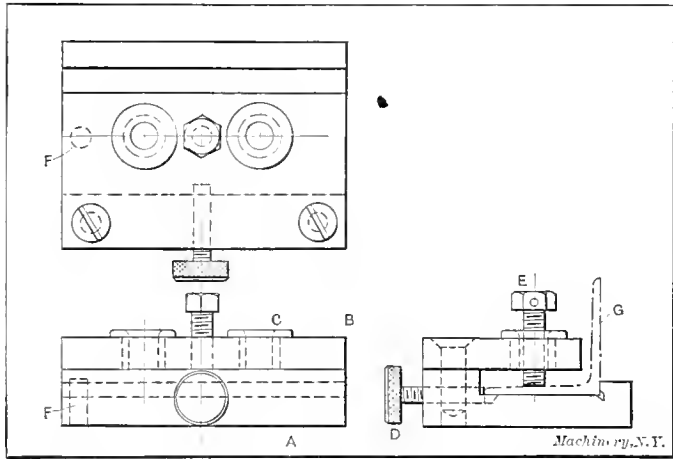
Simple Jig for Drilling Accurately-spaced Holes in Angle-iron to produce interchangeable work. It is also intended to include in this article some examples of simple lathe and boring mill chucks, which, while they are not, properly
